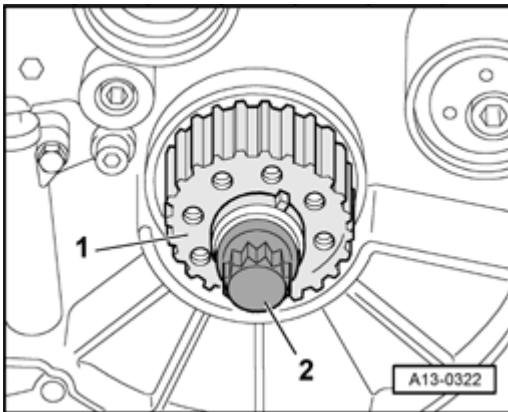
Removing/Installing Center Bolt For Crankshaft Toothed Belt Gear
